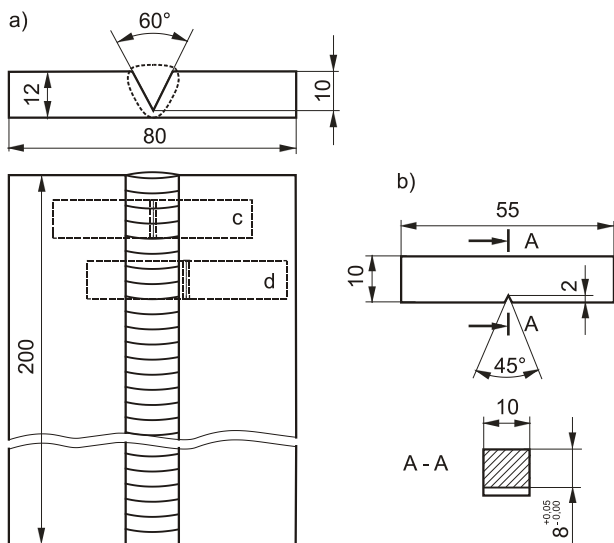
Dimensions of workpiece (a) and test specimen (b) and locations of taking test pieces; c - test specimen for toughness testing in all-weld metal, d - test specimen for toughness testing in heat-affected zone of parent metal
